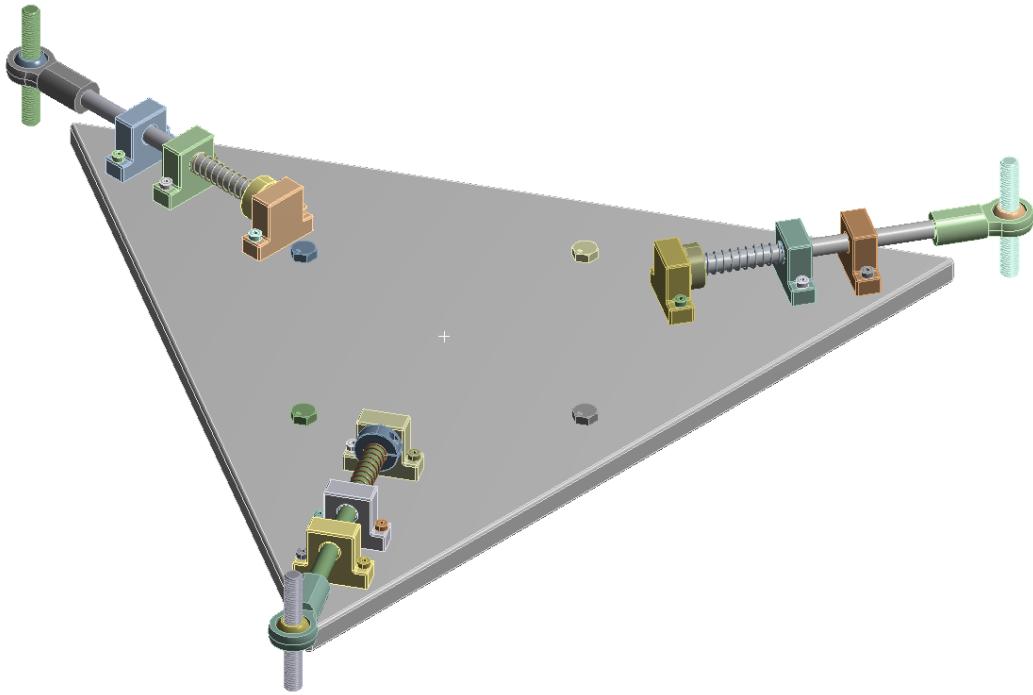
Additional view of the whole platform with all three spring assemblies shown
